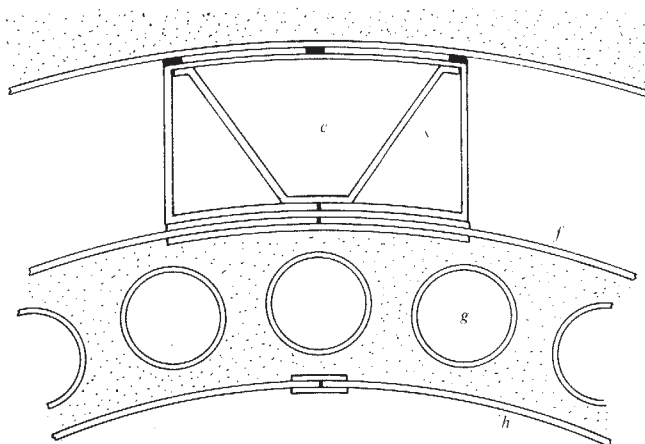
Enlarged section of the spline pump, showing one ridge and the manifolds. *c*, Paraxial ridge shown in Fig. 5; *f*, outer tube containing manifolds; *g*, pipes of 1 m diameter; *h*, large tube, forming the low pressure manifold.
